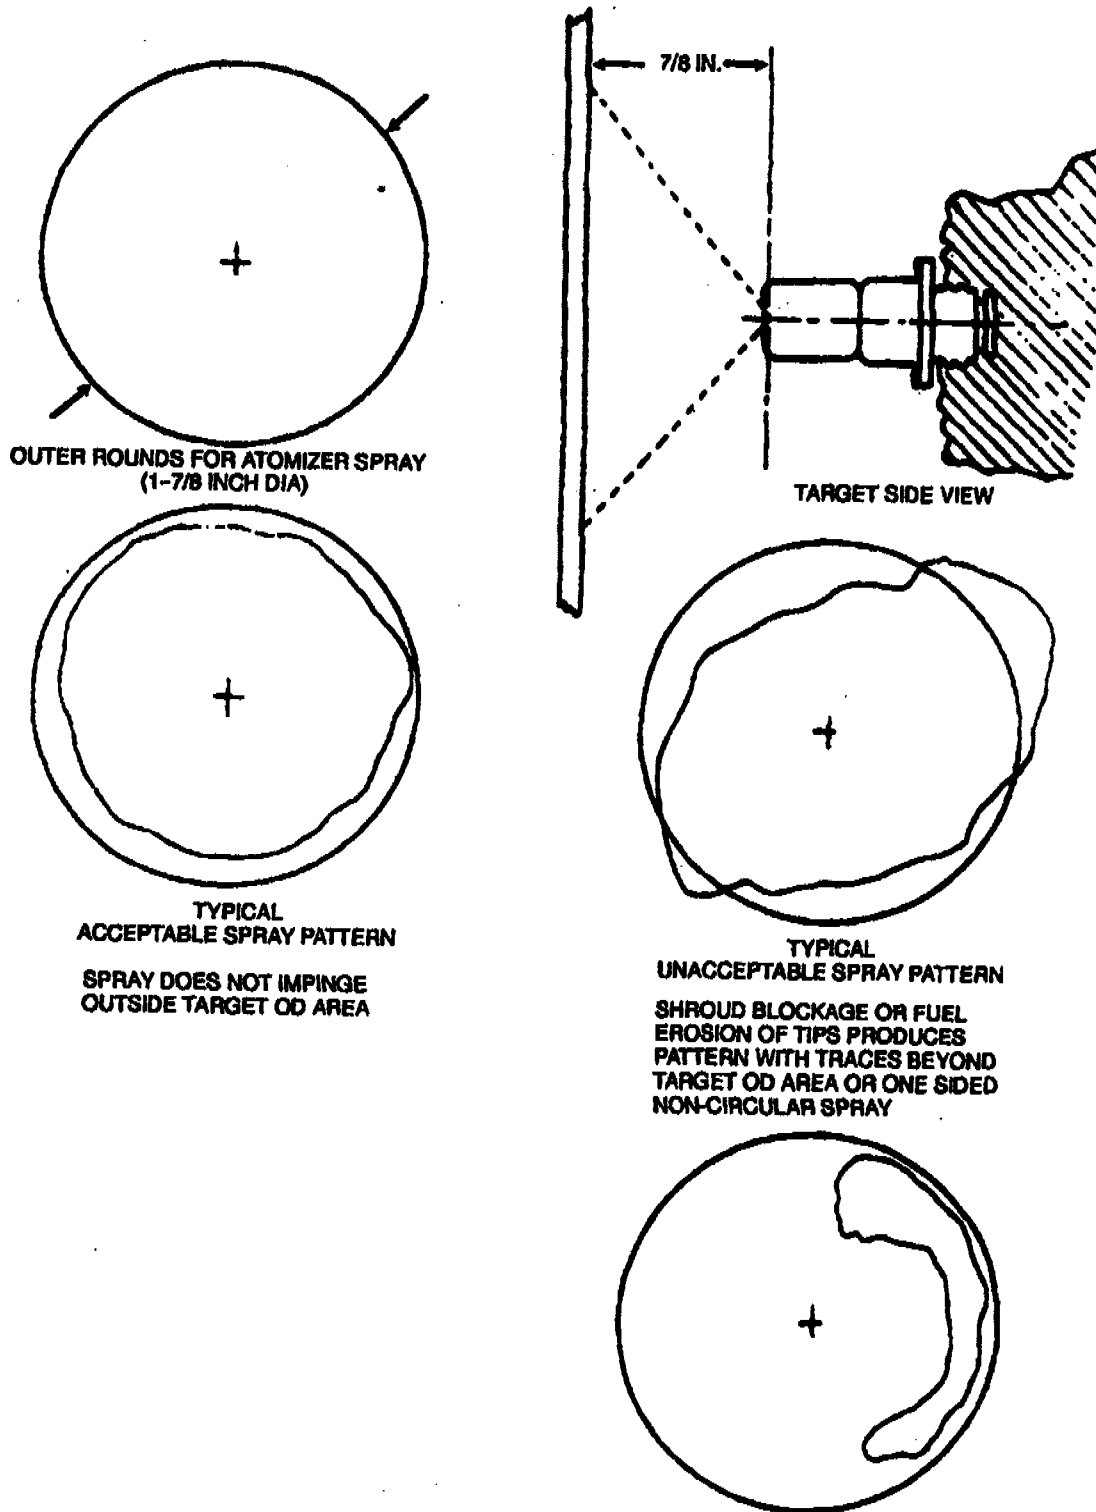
Manifold Nozzle Spray Cone Pattern Definition on Test Fixture Target.
